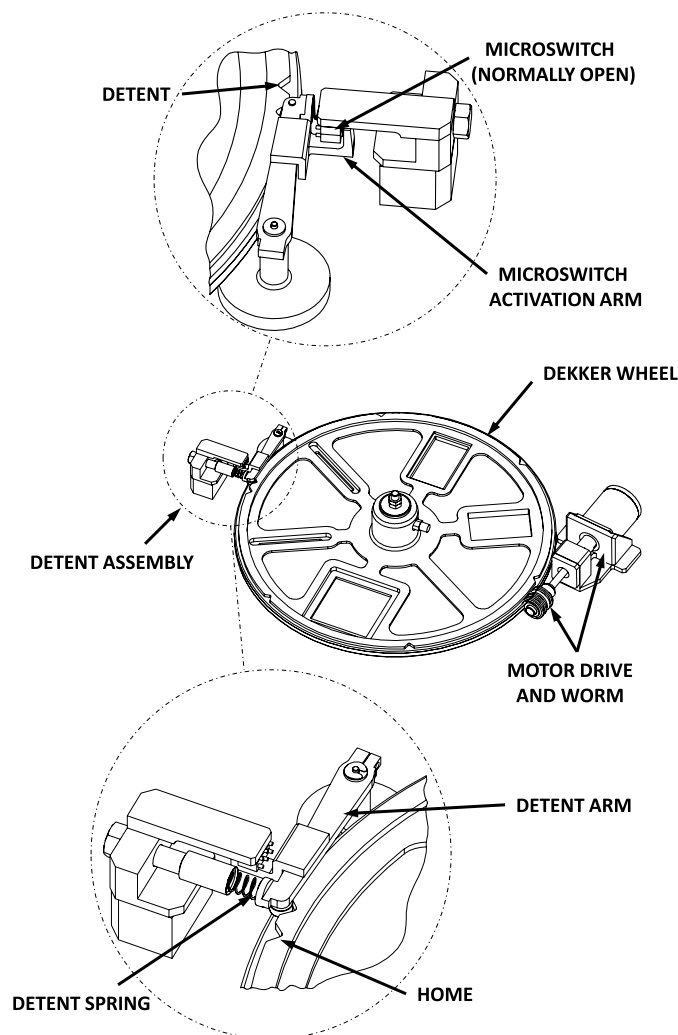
Drive and detent mechanisms for the Dekker wheel. A stepper motor drives the wheel through a worm gear. An arm on the detent assembly depresses a microswitch to sense detent positions. The slit mask, filter, and disperser wheels operate in the same fashion.
